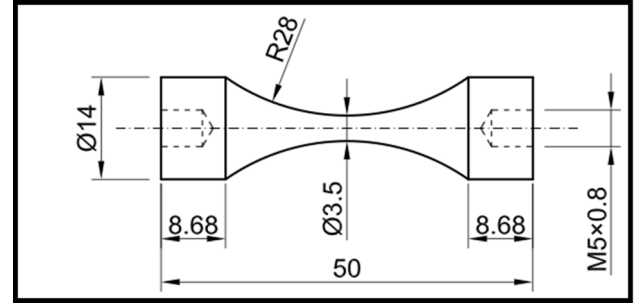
The shape and dimensions of fatigue specimens (in mm).
